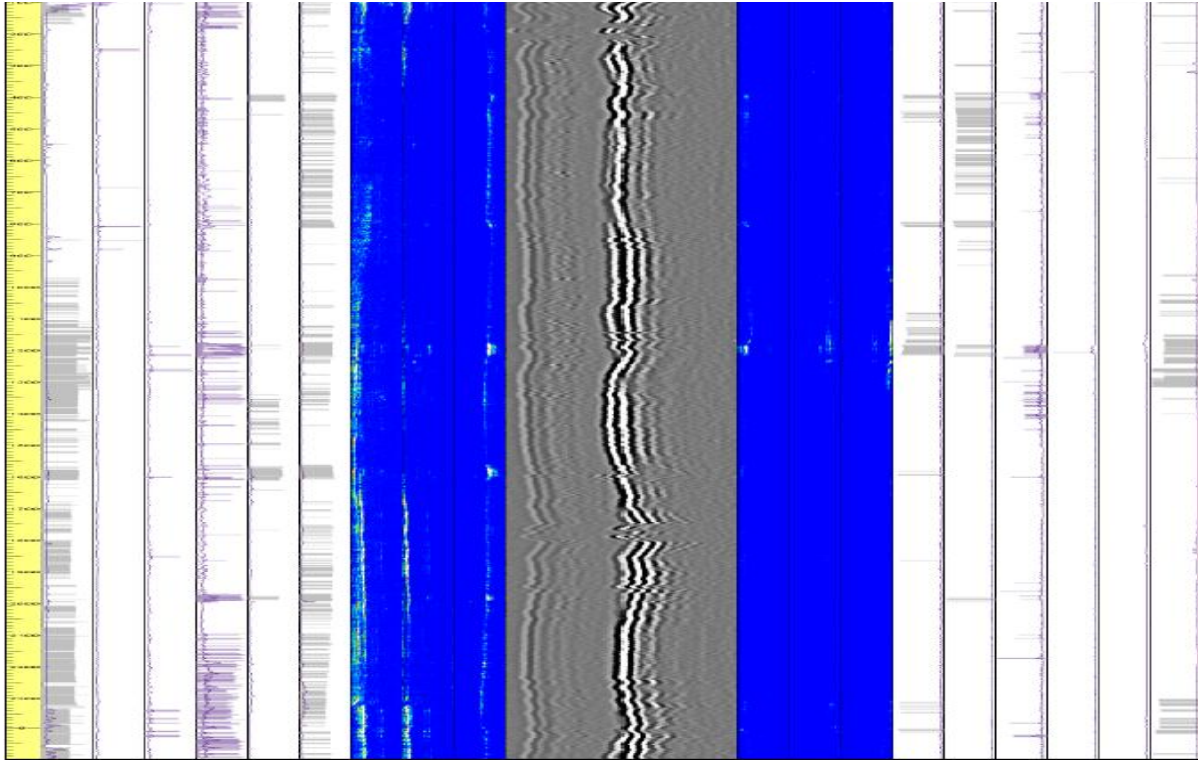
Weld MLA 4568 - UTQ Screen Capture
